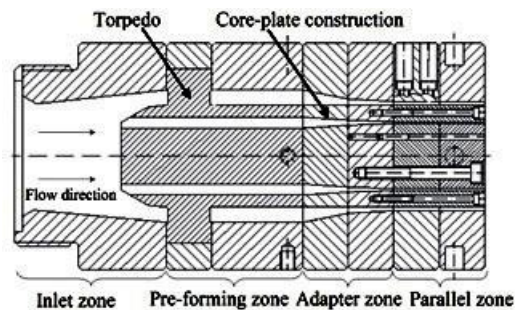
Schematic illustration of combined plate-torpedo construction of extrusion die
